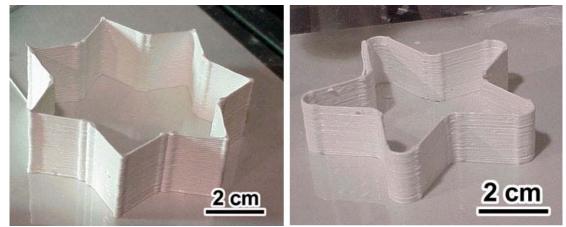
Thin wall polygonal parts (before binder burnout and sintering) fabricated with the extrusion force controller.
